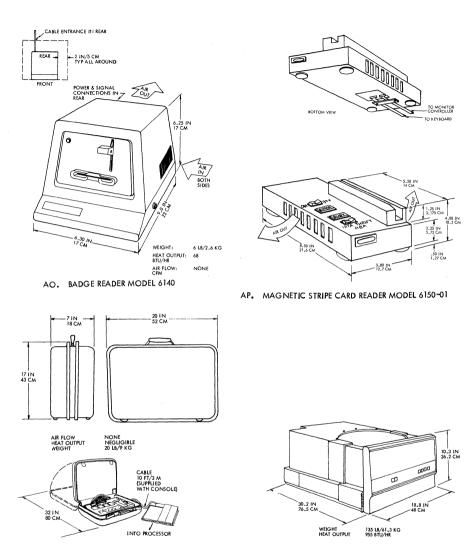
Cabling, Dimensions, Weight, Mounting Clearances, and Air Flow (Sheet 16 of 17)
